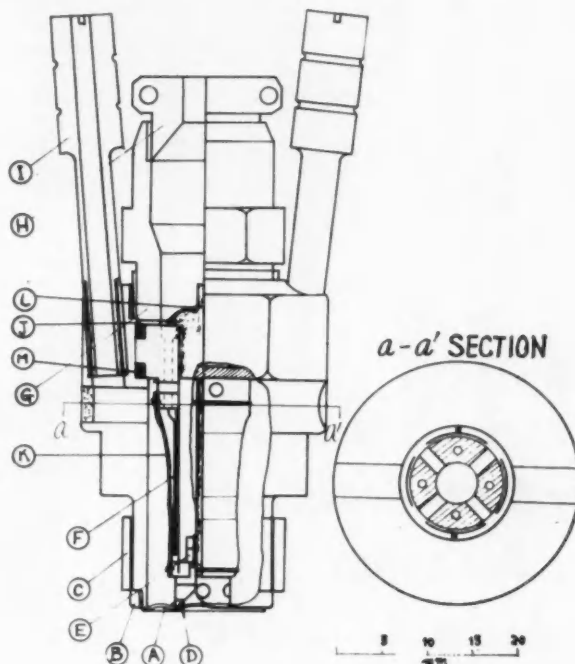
Water-cooled model MV strain-gage-type indicator. A — caterinary diaphragm, B — ring, C — 18-mm thread ($P=1.5$), D — float preventer, E — connector nut, F — strain generating tube, G — strain tube support, H — connector lead support, I — water intake tube, J — sealing ring, K — rubber tube, L — blind stop.
